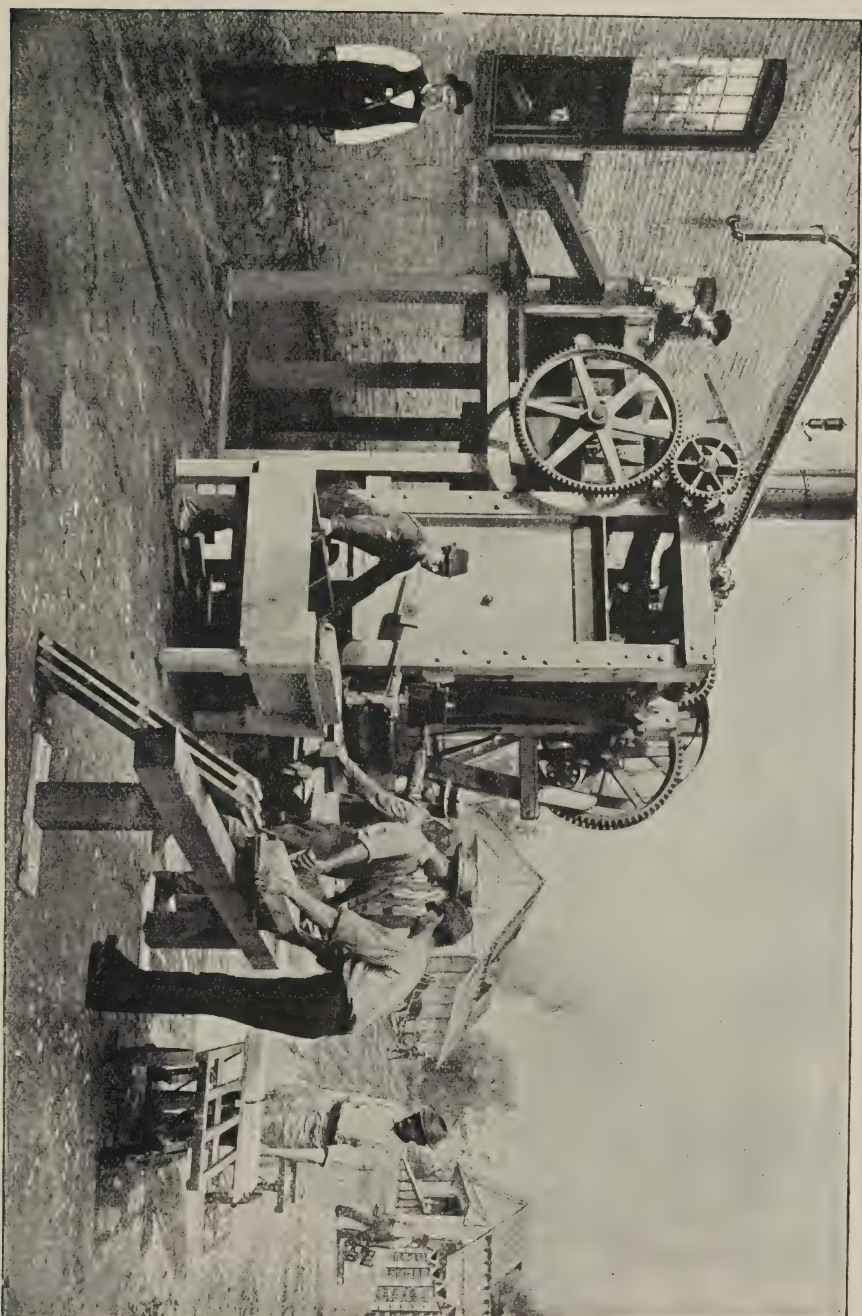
View of soft-mud brick molding machine, clay elevator and pug mill at work.
